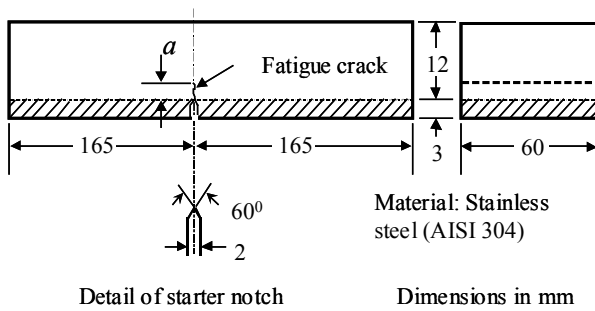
Geometry of the specimen having a fatigue crack
